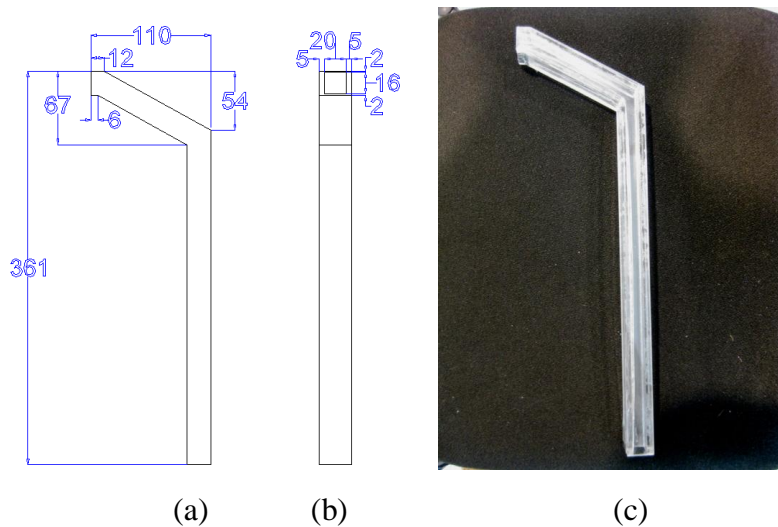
(a)-(c): Side View, Front View with Dimensions (in unit of mm) and Actual Outlet Ducting
